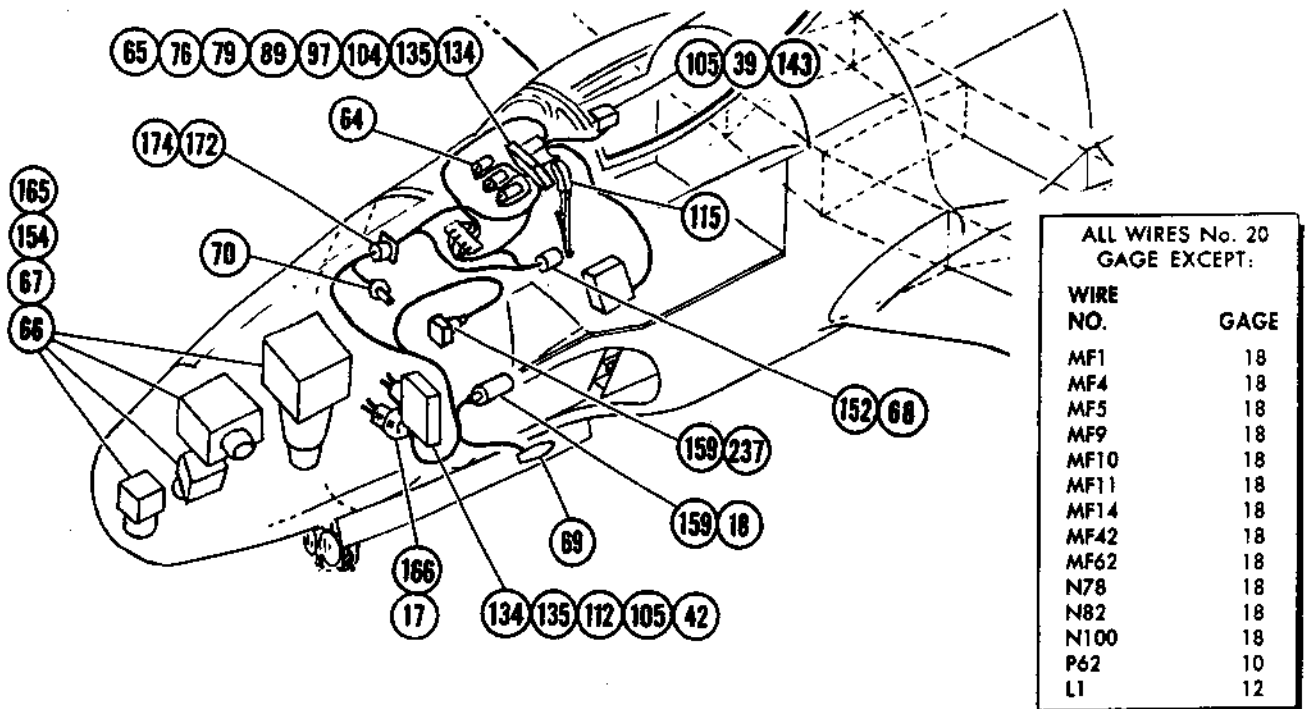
A (Sheet 1 of 2 Sheets)—Camera Equipment Wiring Diagram, FP-80A-10 Airplanes
